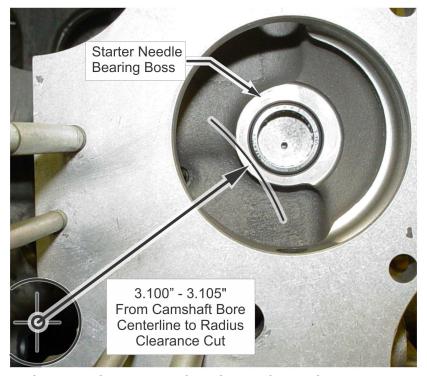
Radius Clearance Cut, Distance from Camshaft Bore Centerline, Permold Crankcase
